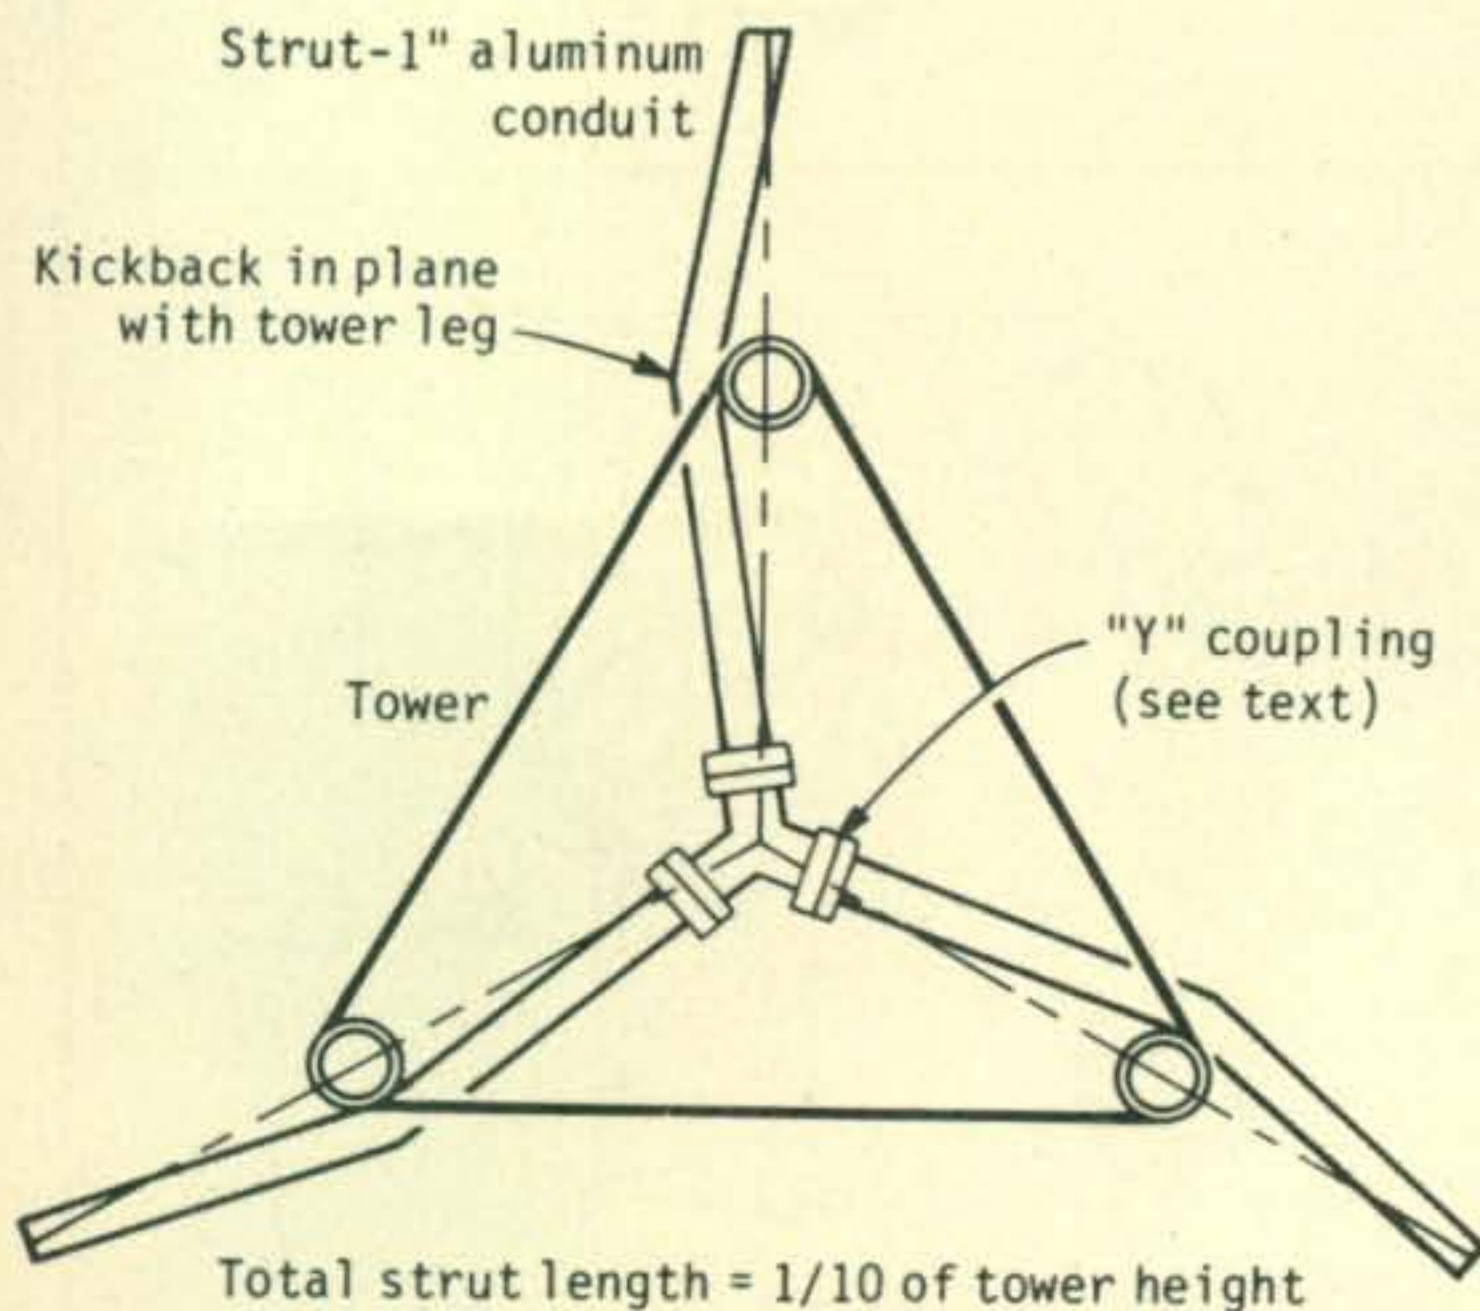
Strut design—top view. “Kick bend” in each strut is used to align strut end with tower leg.
